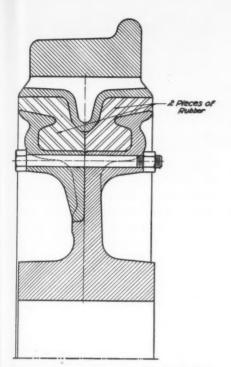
Cross-section through wheel, showing rubber insulators precompressed when the wheel is bolted together.
